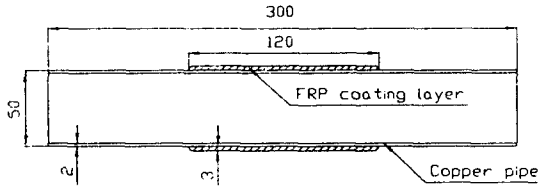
Specimen configuration for fatigue test (dimension : mm)
